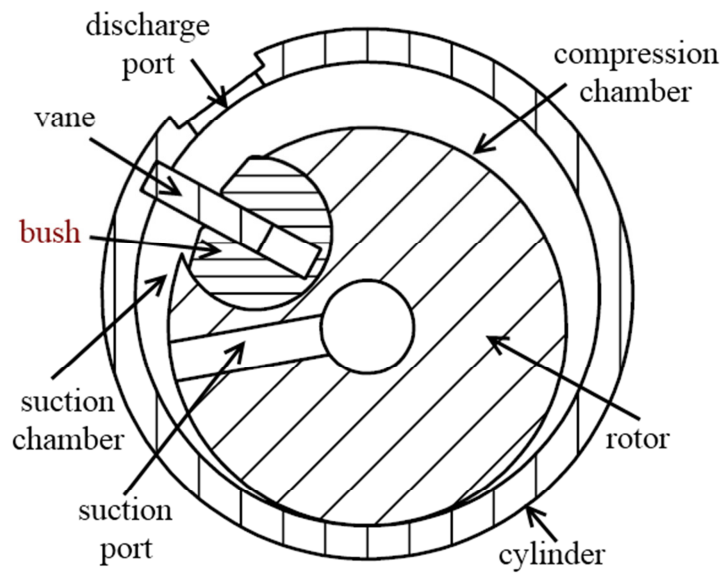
Fixed-vane revolving vane compressor with cylinder drives and bush
